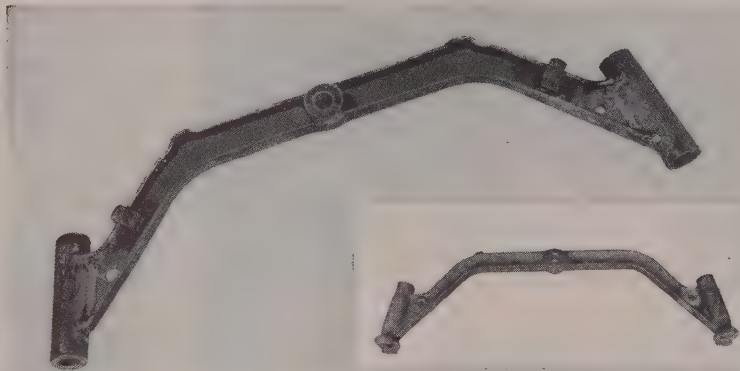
Weight reduced 30% . . . cost cut 43%.* Present design, all welded steel front axle. Has pressed steel channel frame and steel spindle housings. Inset shows former construction of cast steel.
